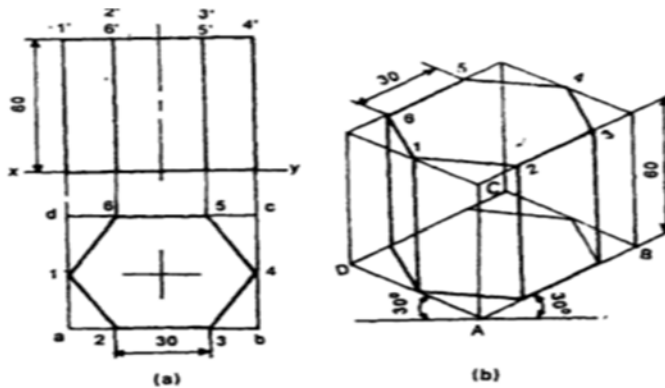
Isometric Drawing of a Hexagonal Prism
